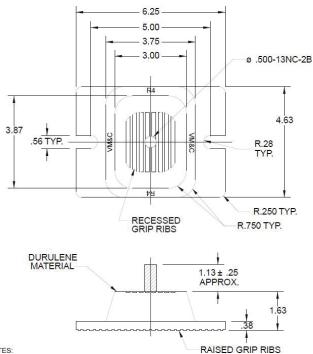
Rubber-in-Sheer Mounting (RP-4) Isolater Dimensions
